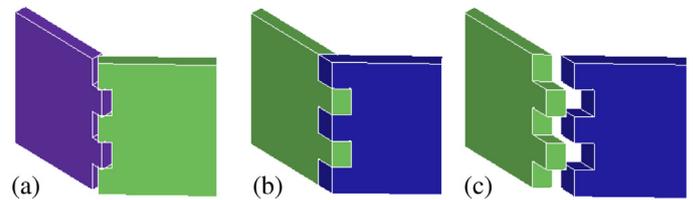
(a) Finger joints of a watertight structured achieved in [25]. (b) Bevel joints of a planar structure. (c) An exploded view of the bevel joints in (b).
